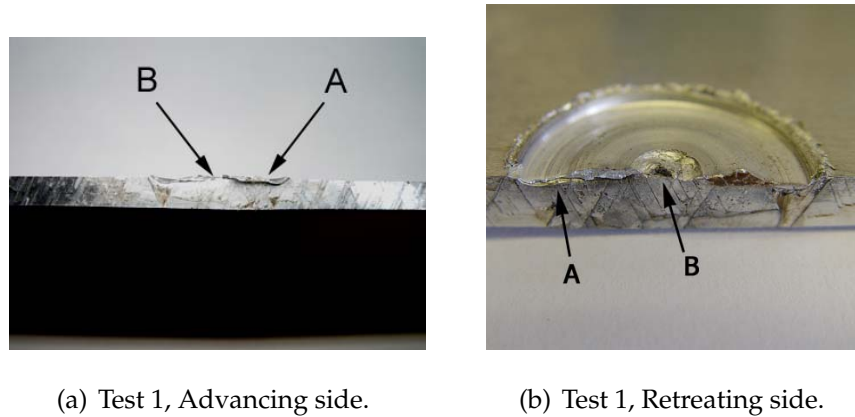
Detail views of the welds, comparing the the advancing and retreating side of the first weld.
